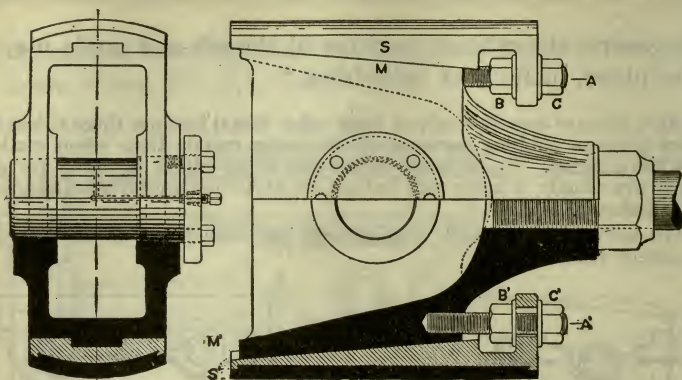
and 258.—Fishkill-Corliss crosshead. The cylindrical gibs are adjustable by means of transverse eccentric keys as shown in the sectional end view. A key is used to secure the piston rod.
